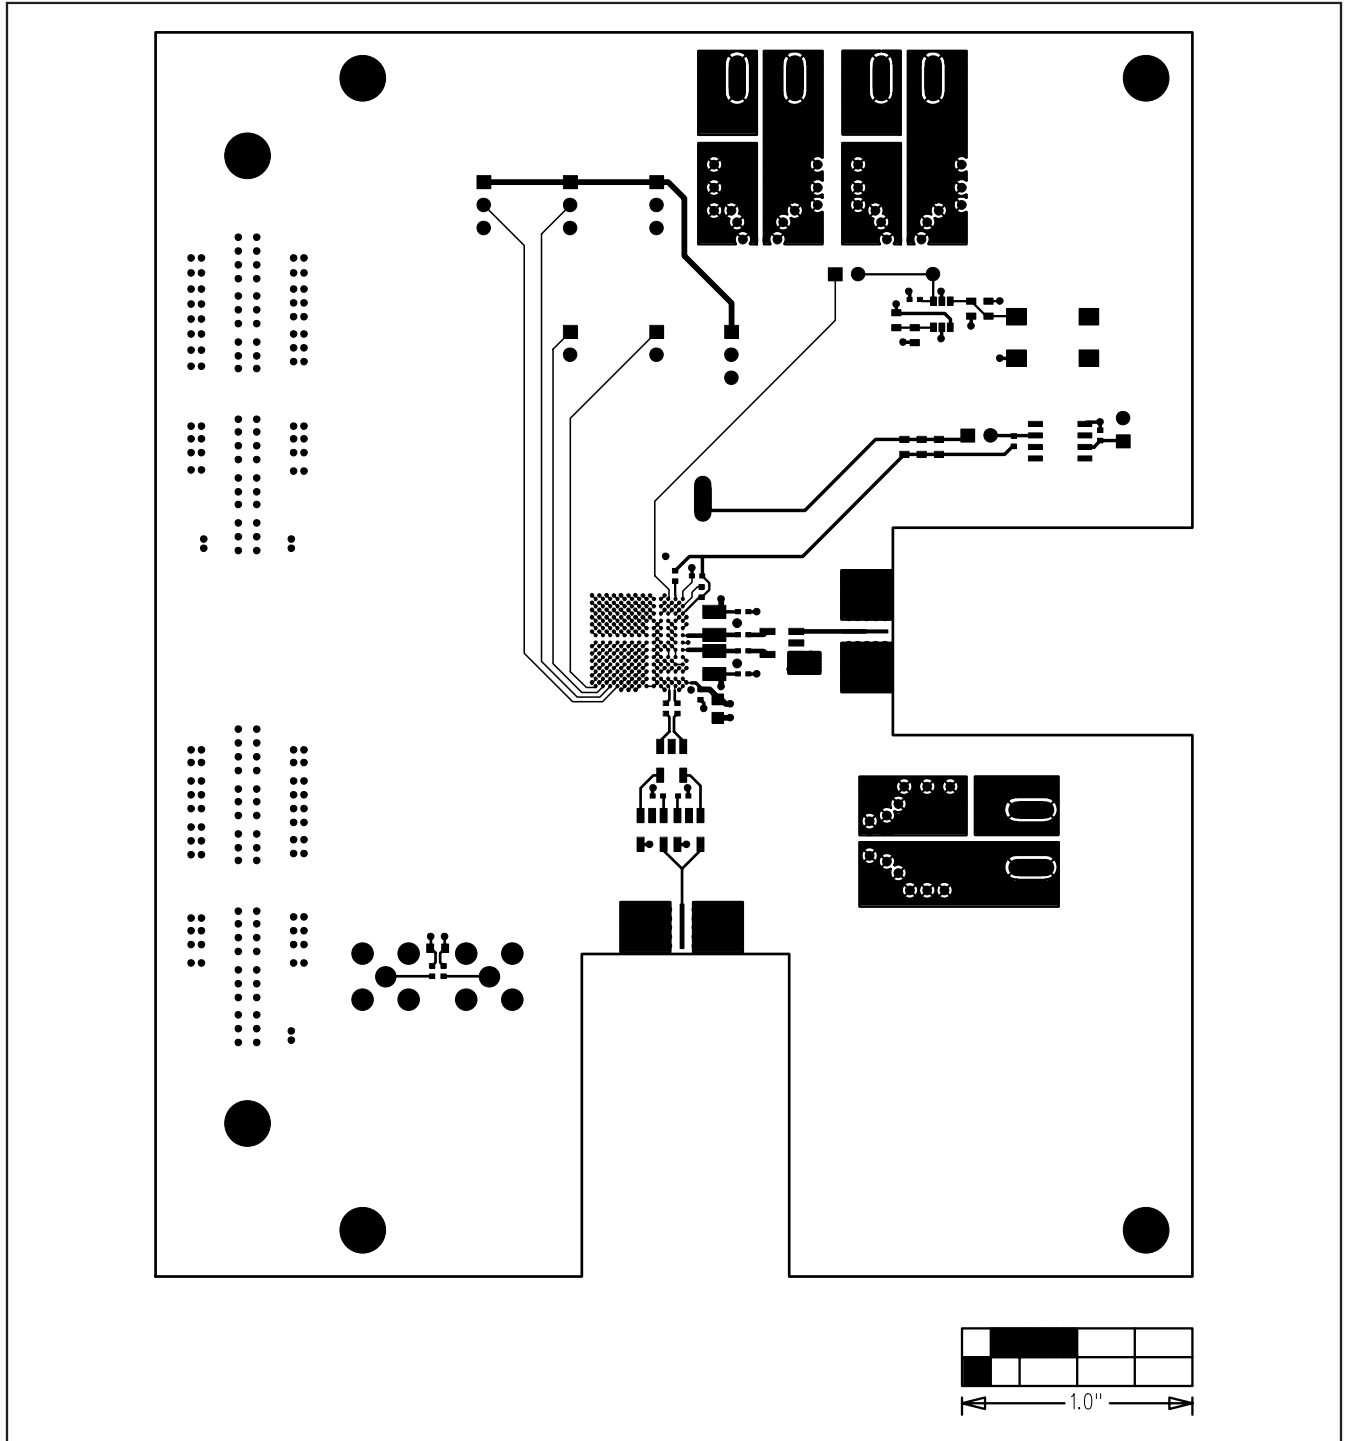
MAX19692/MAX19693 EV Kit PCB Layout—Component Side
